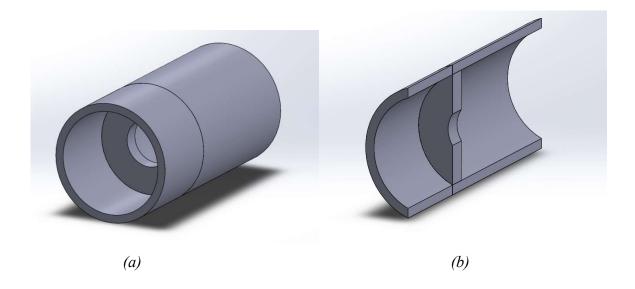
CAD model of orifice flow meter tube (a) isometric view (b) sectional view
